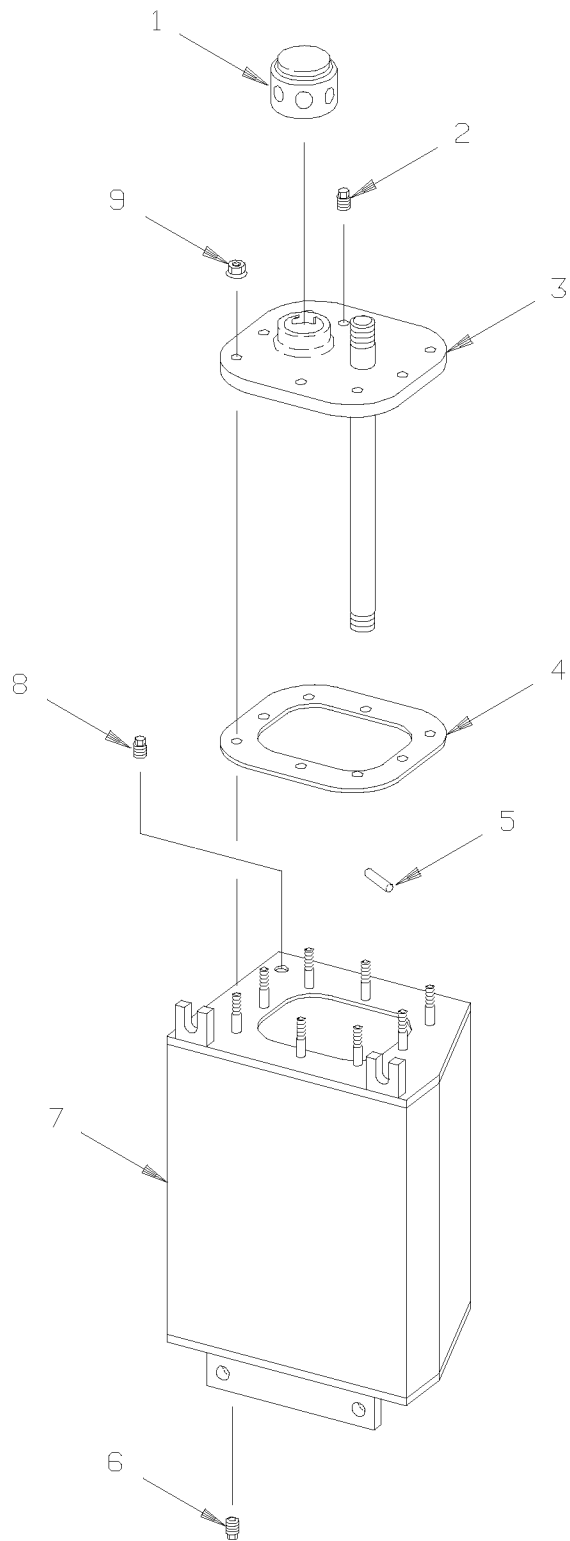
SC-30 TWO STAGE LIFT CYLINDER ASSEMBLY, 1.125 INCH (24477-XX)
